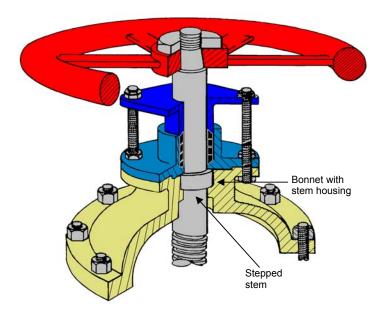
Detail of Upper Stem Location—Non-rising Stem Gate Valve
